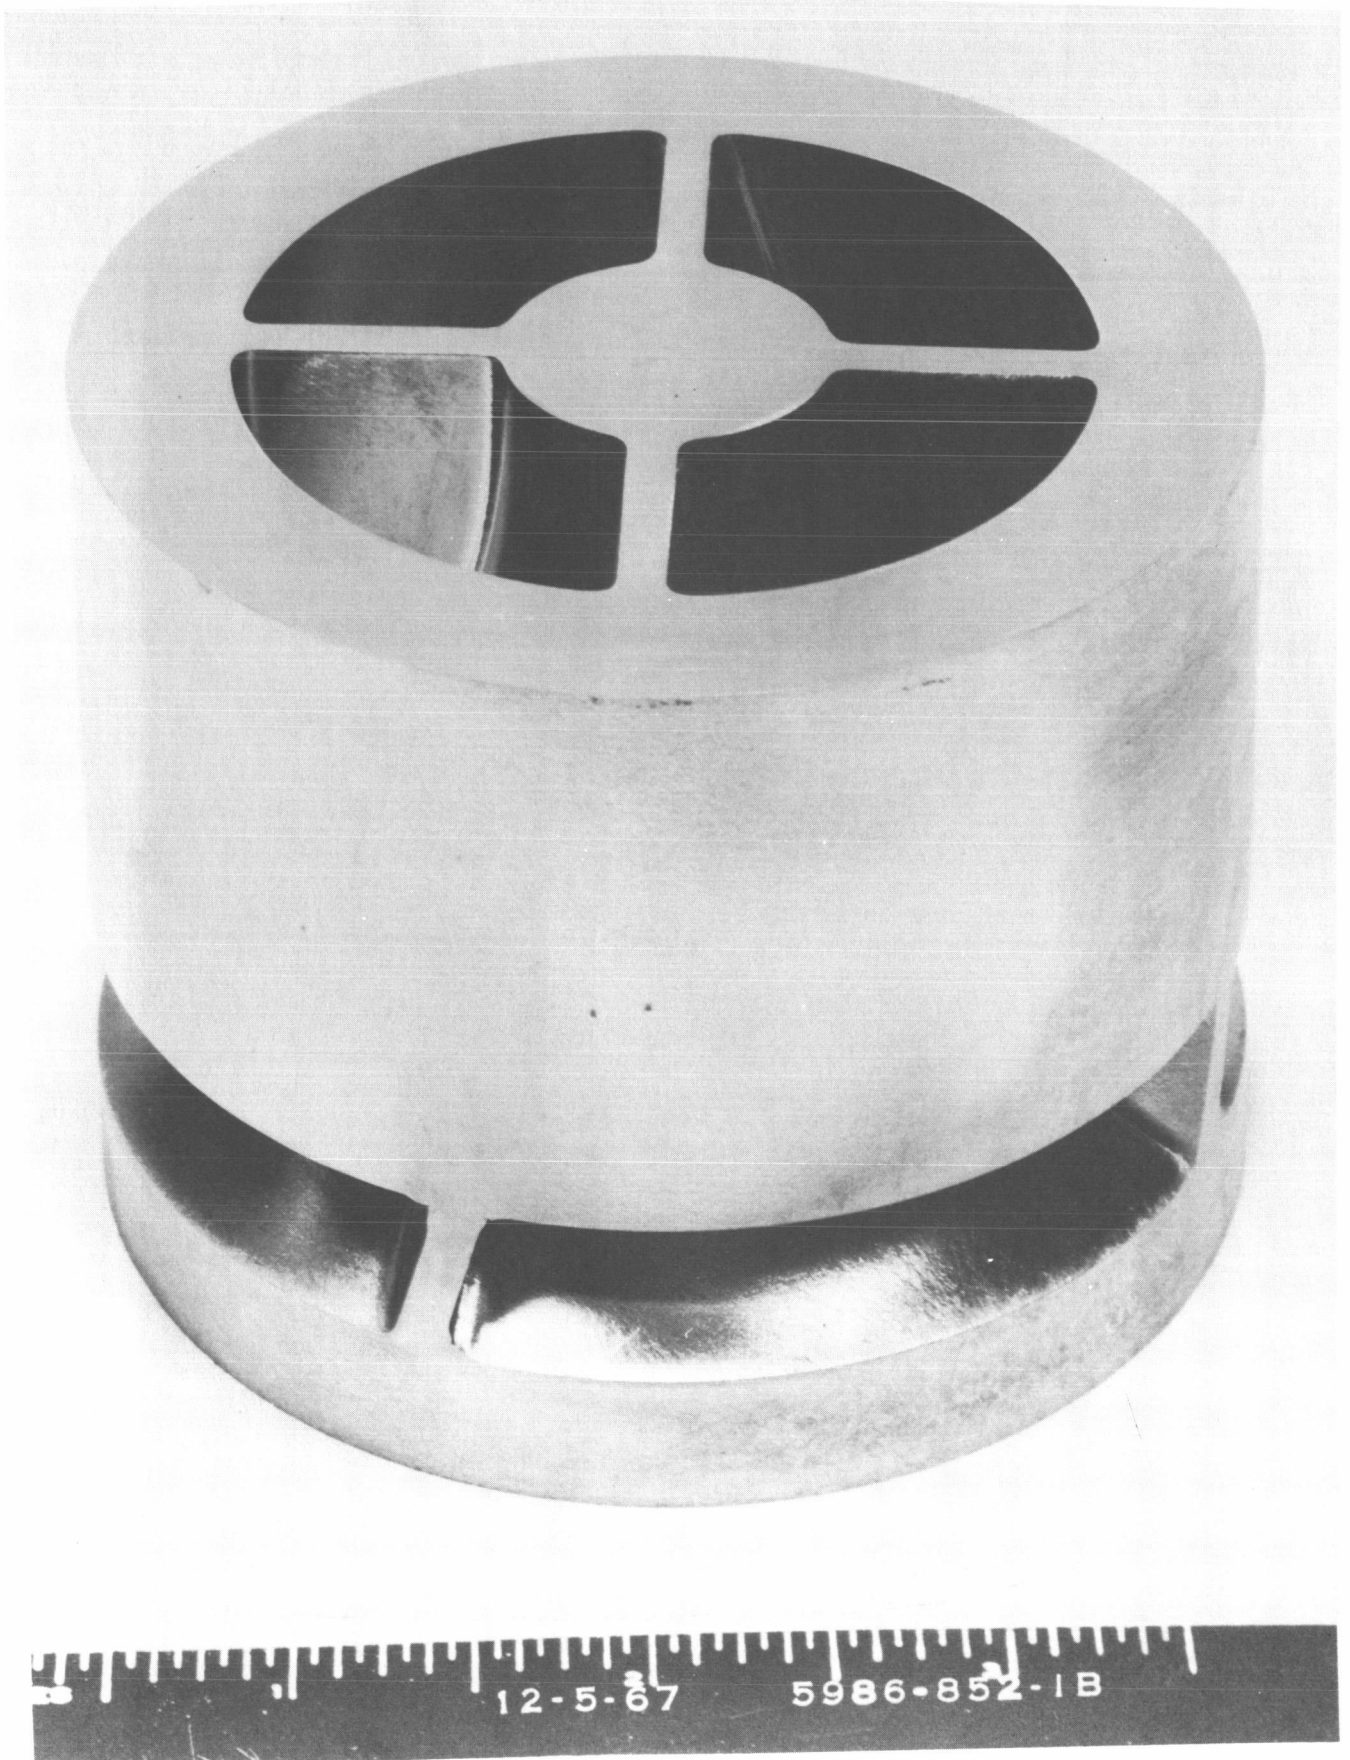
First Trial Sample After Chem-Milling - Discharge View
